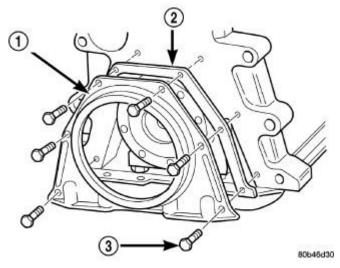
Crankshaft Rear Seal Retainer, Gasket & Bolts Courtesy of CHRYSLER GROUP, LLC
